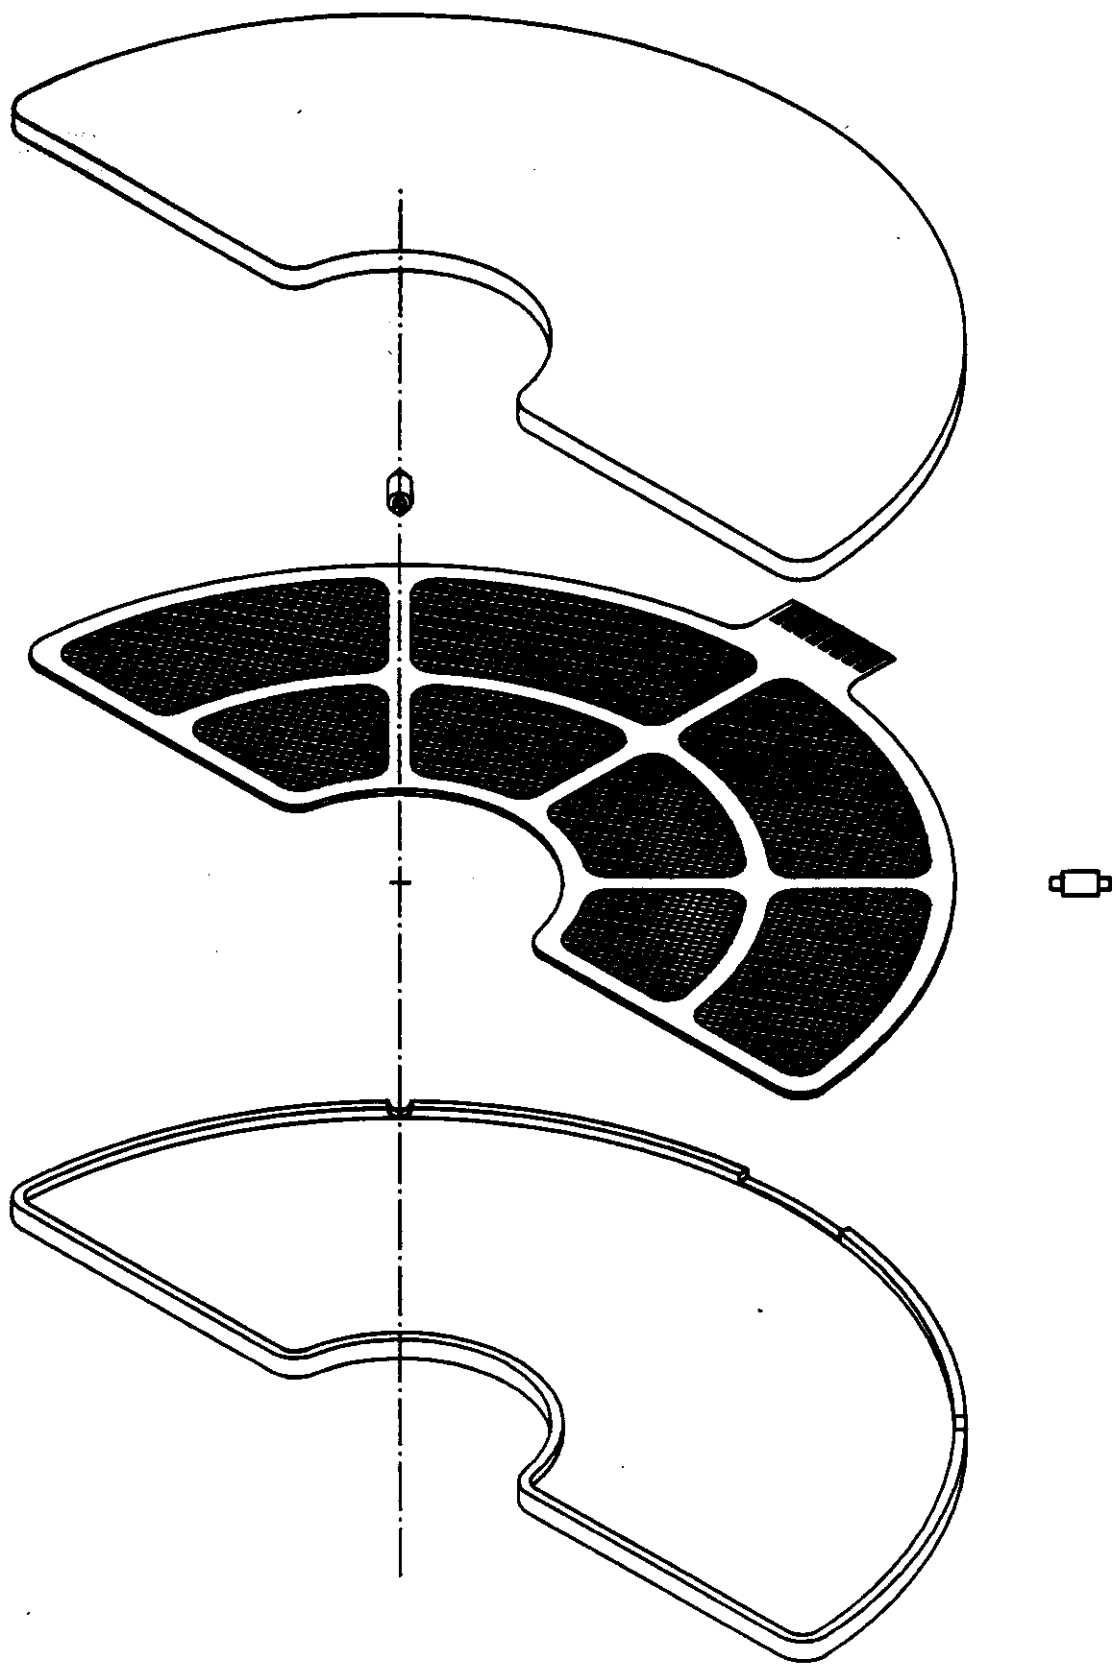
Exploded view showing metalized ceramic electrode and outer steel vessel.
